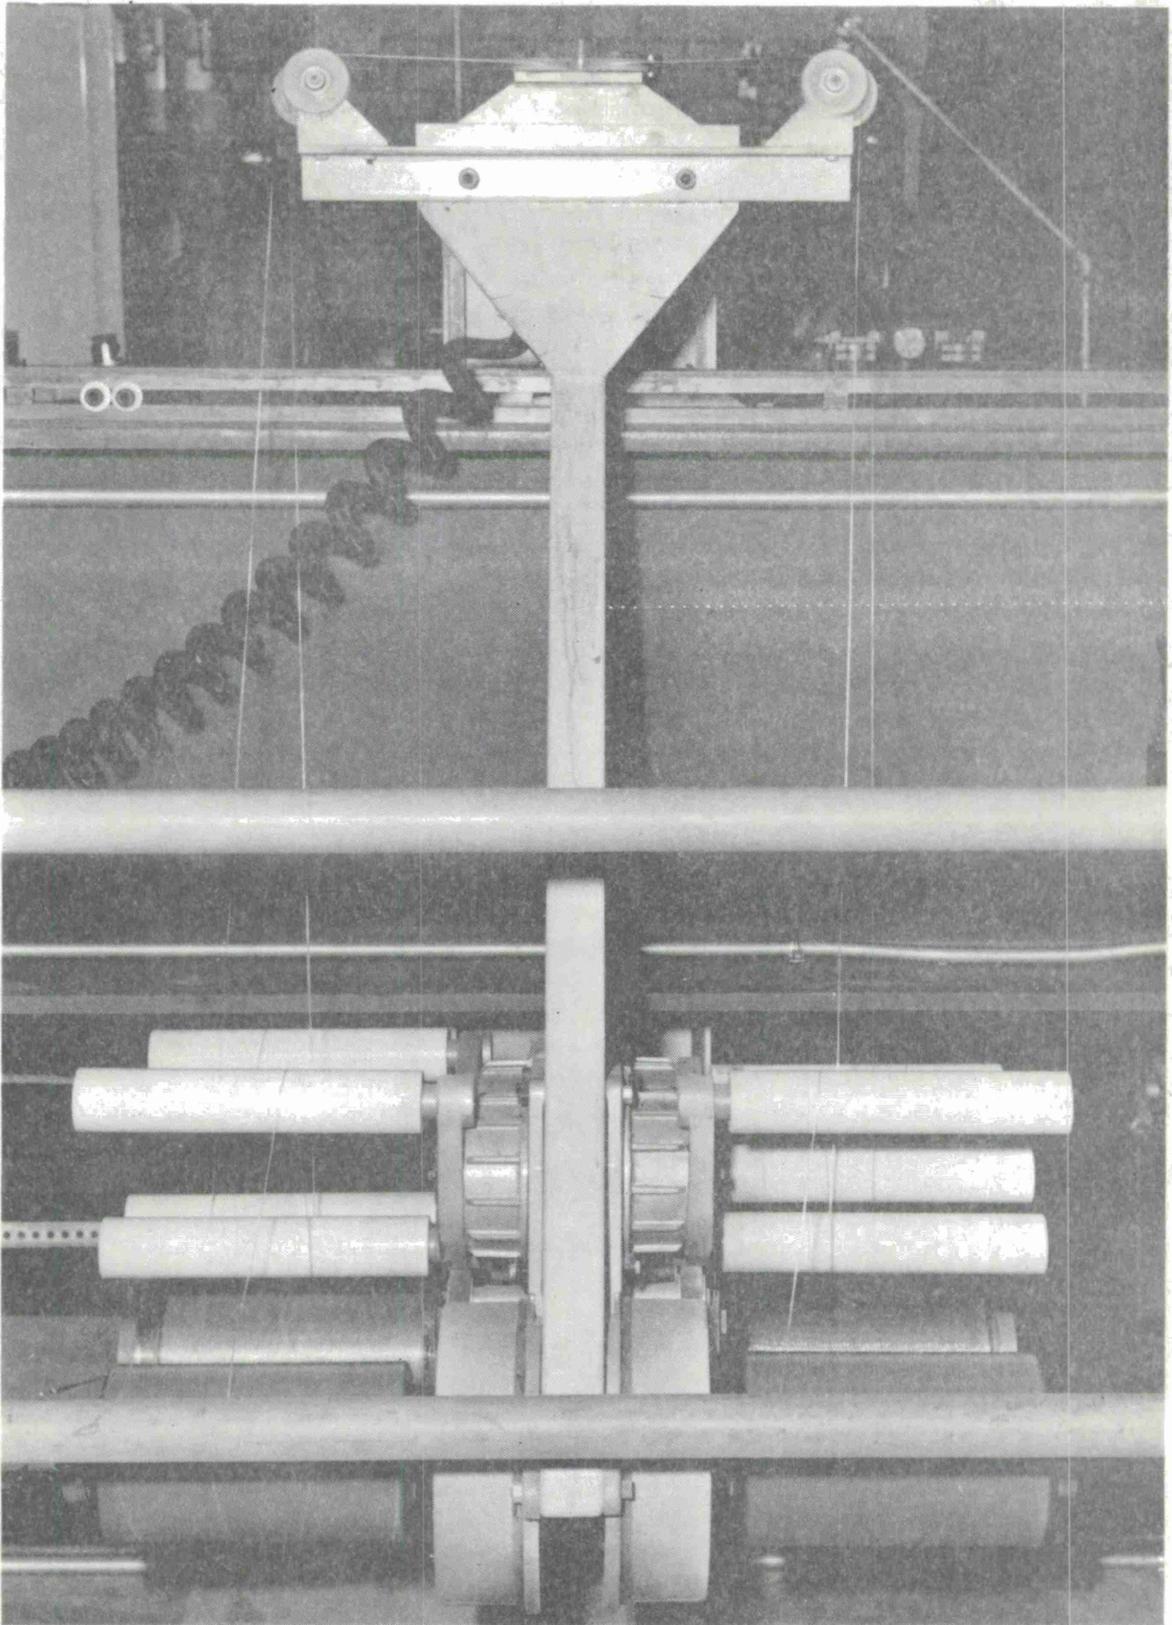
Rear view of traversing mechanism with four tension devices (with spools).
